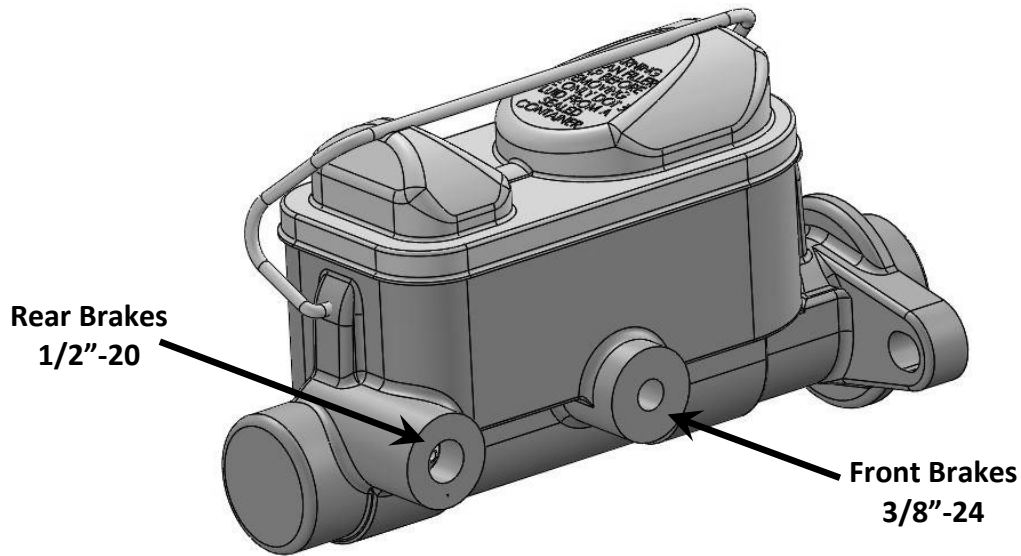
Brake Line Routing for 1" Bore Master Cylinder (MC11378MM)
